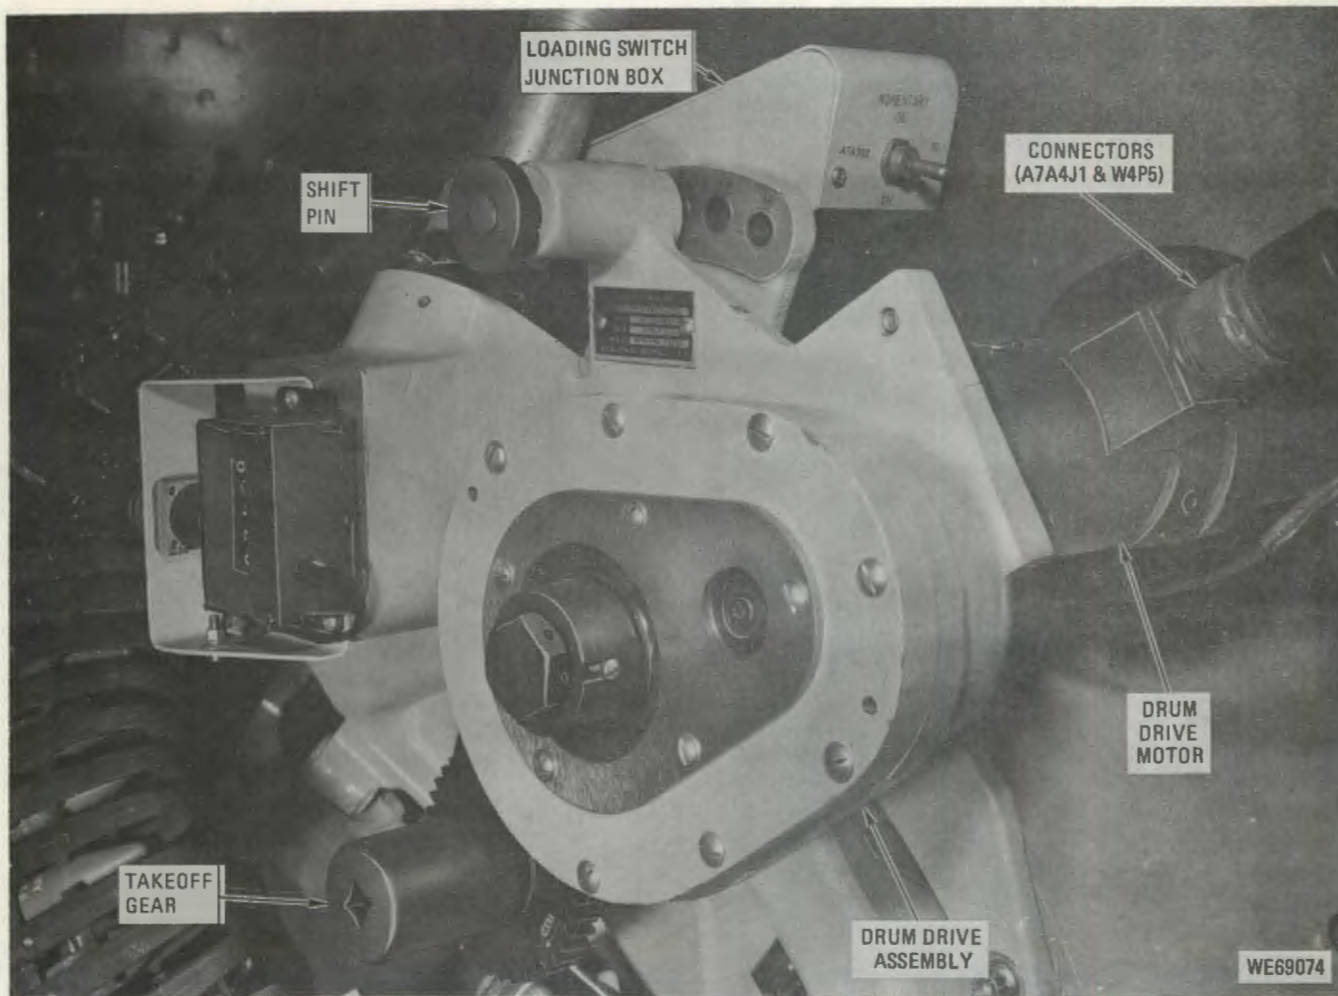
Drum drive assembly and drum drive motor, parts location.
